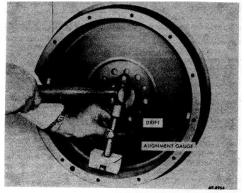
Installing Intermediate Plate Driving Pins (14 Inch Clutch)
